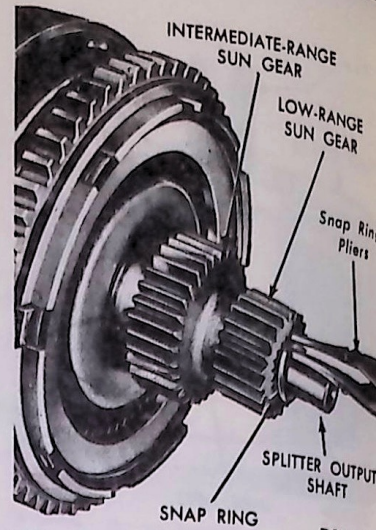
Low-Range Sun Gear Snap Ring Removal
